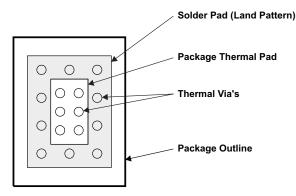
Package and PCB Land Configuration for a Multilayer PCB
